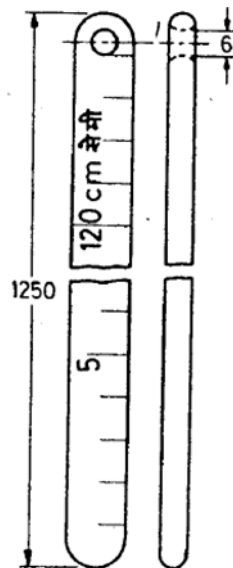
DIMENSIONS FOR FLEXIBLE SOUNDING RODS
